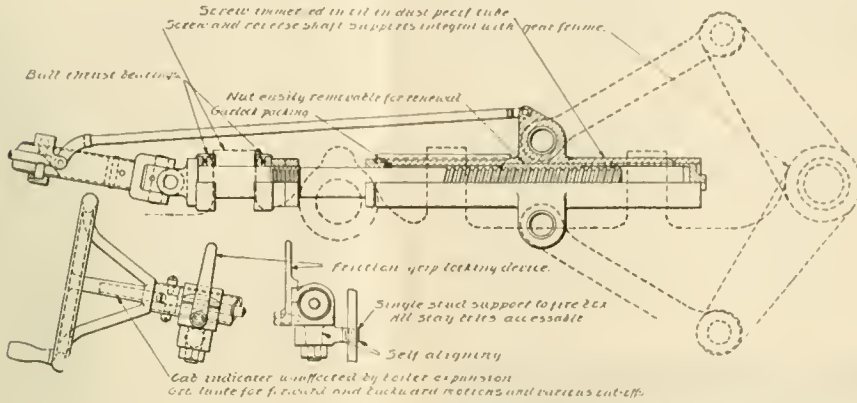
SECTION VIEW OF THE REVERSE GEAR.
